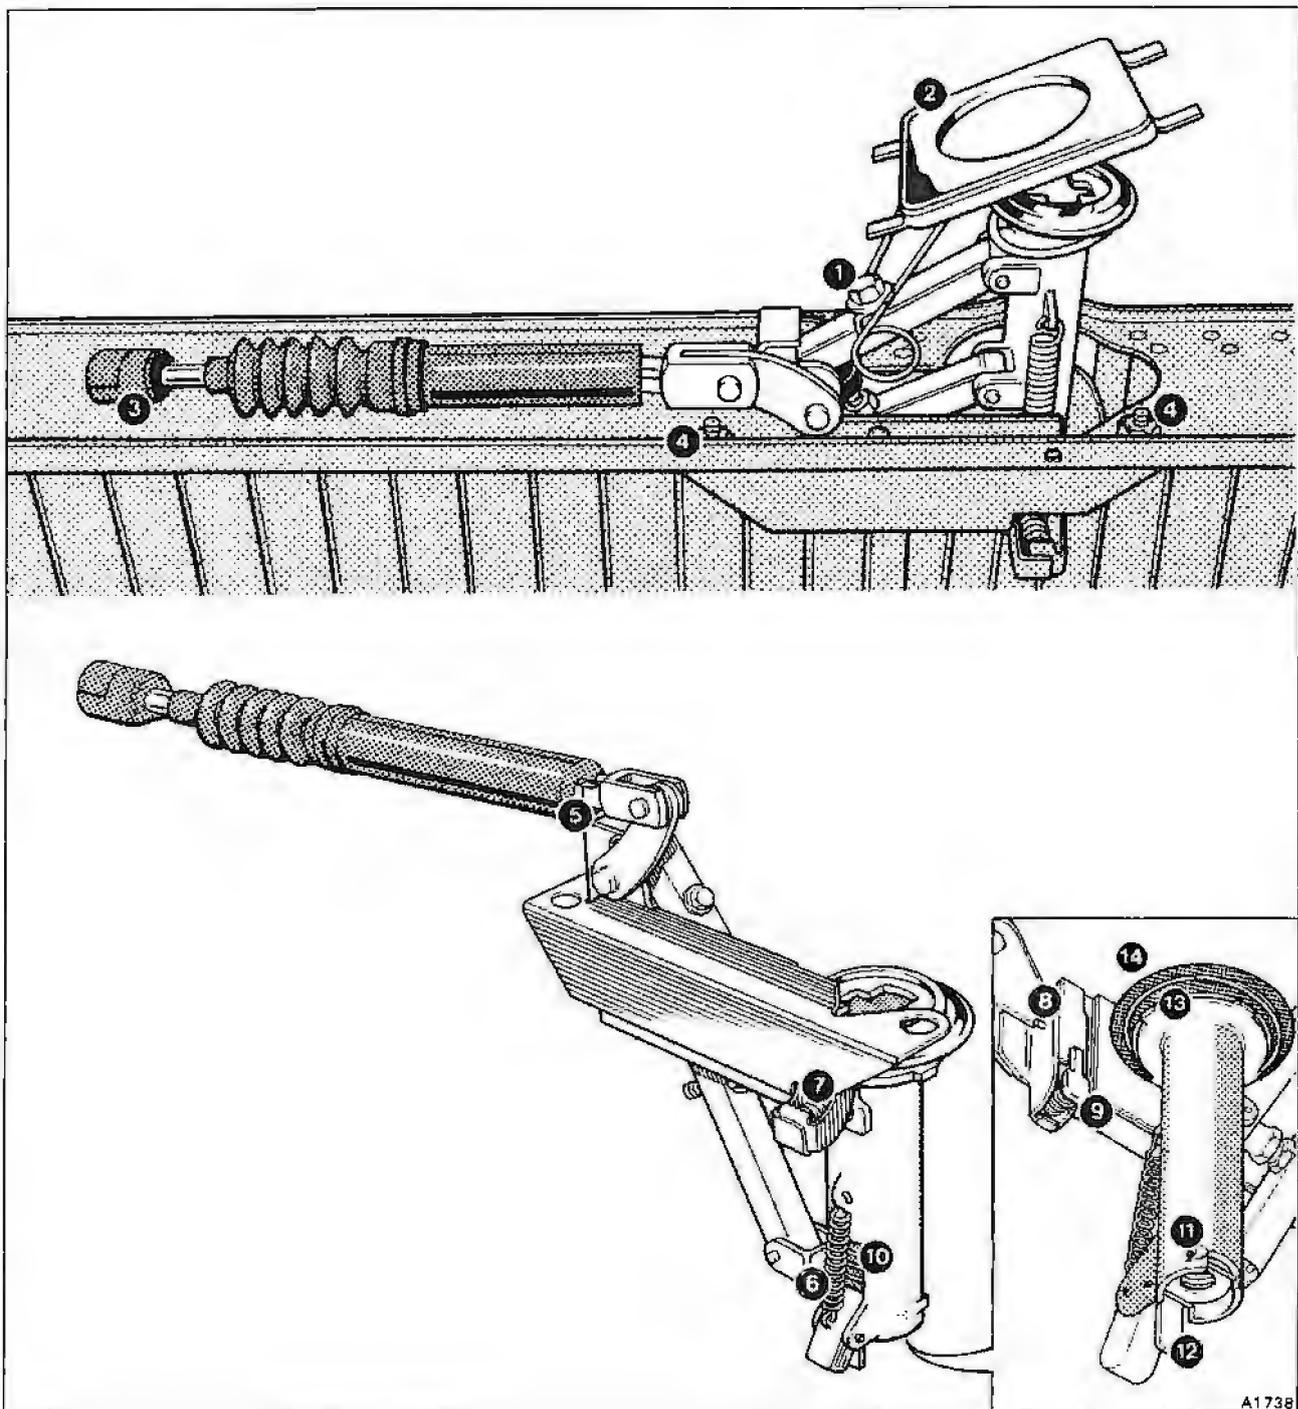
Mascot retract mechanism (gas spring damper)
